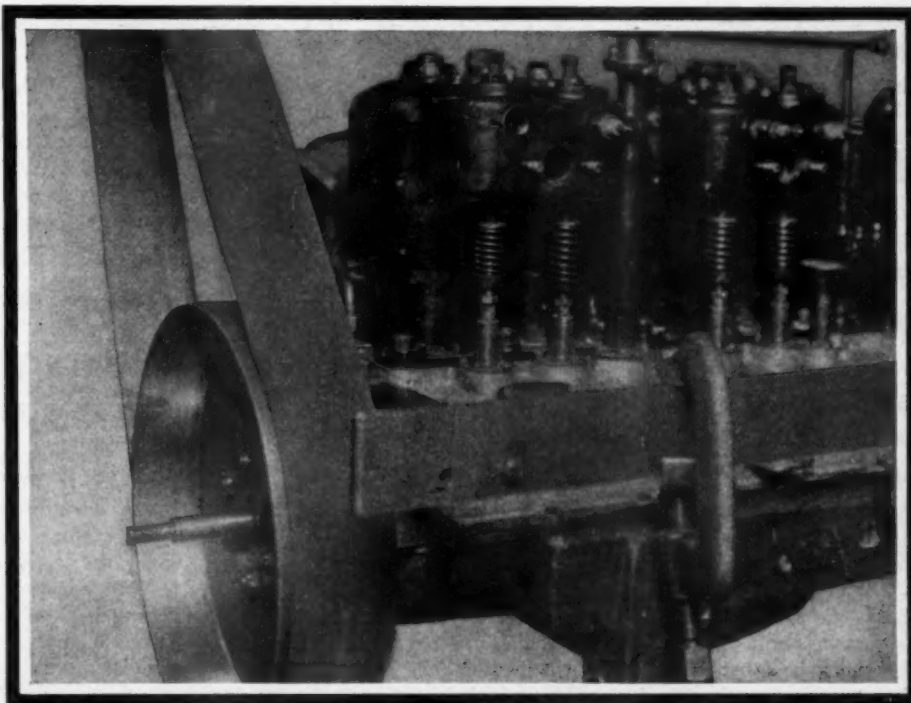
Running a motor from the machinery shafting by a belt attached to the flywheel and a useful method of forming a stay for the motor that can be used as a turntable as well
